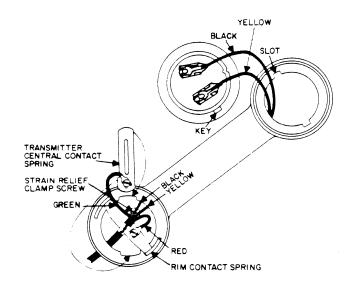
Internal Wiring for Type 810 and 811 Handsets.
